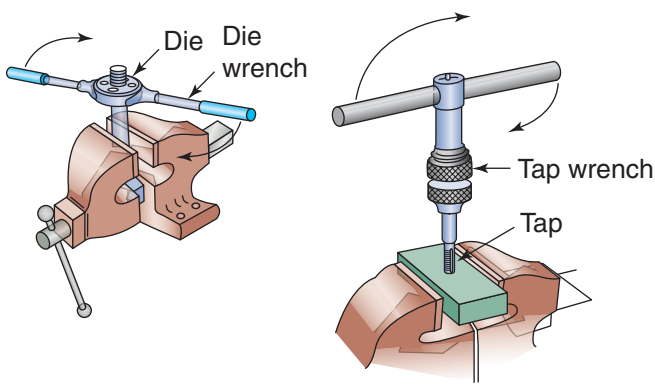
Use of a tap and die to repair threads in different types of fasteners.
